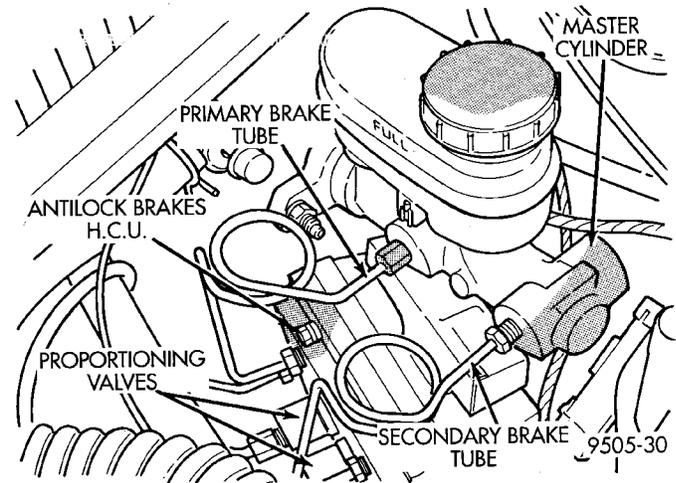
Primary And Secondary Brake Tubes With ABS Brakes
